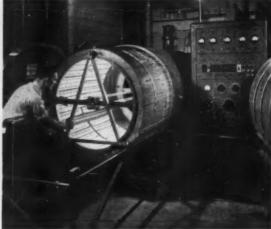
The evaporation source assembly, located at the center of the station holding fixture, consists of filaments and attached metal
